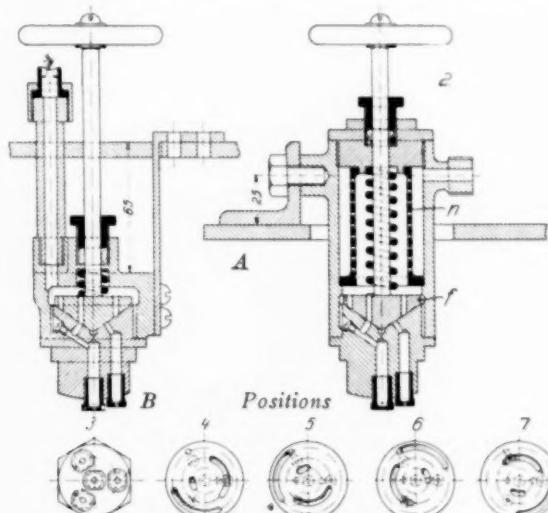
ADJUSTABLE BURNER FOR LIQUID FUEL
